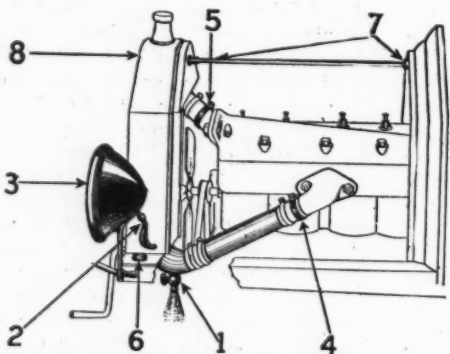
Parts of Ford car to be removed in mounting Gray & Davis starting and lighting system
